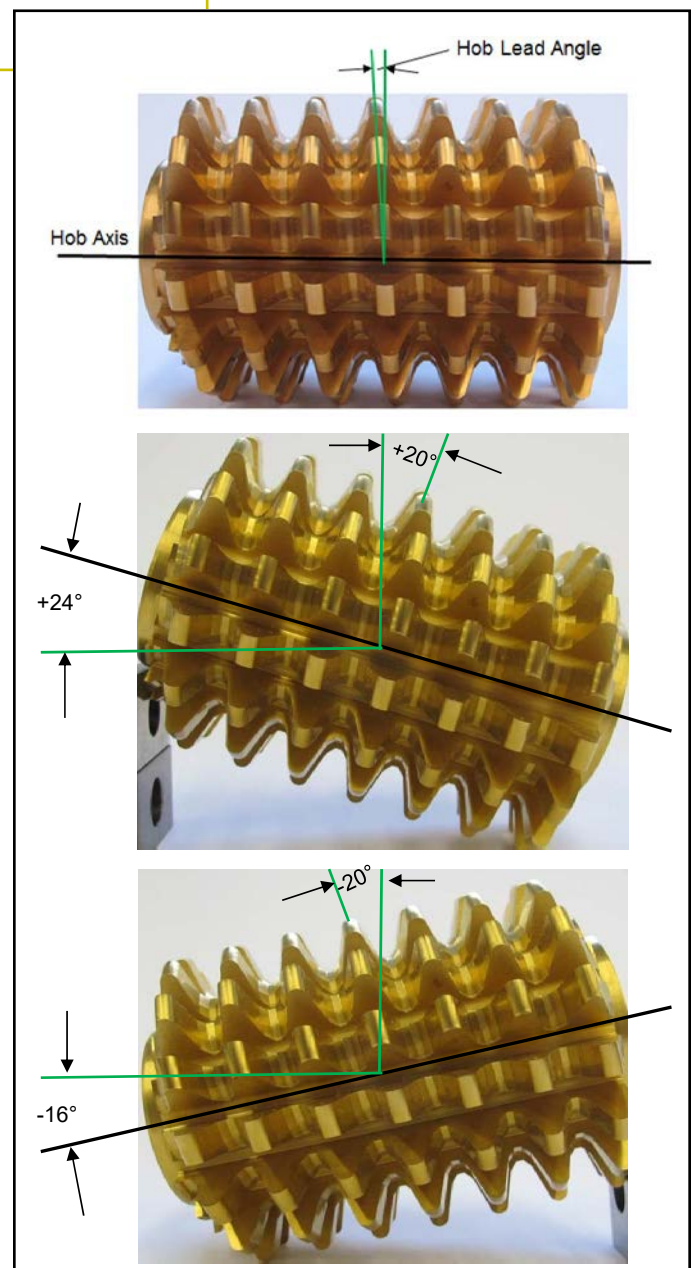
Module 4.75mm single start right hand protuberance hob with tip relief.
